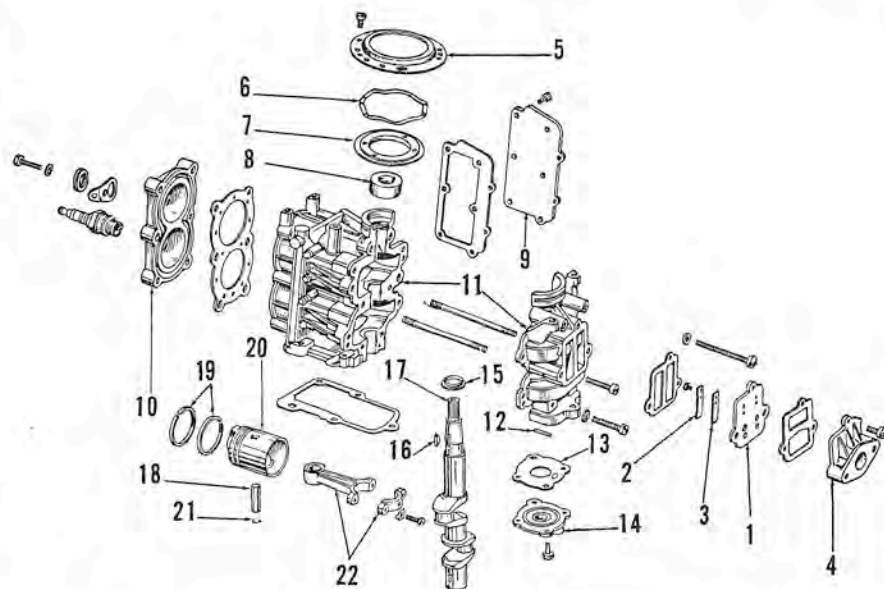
Exploded view of Lightwin power head assembly and reed valves.
